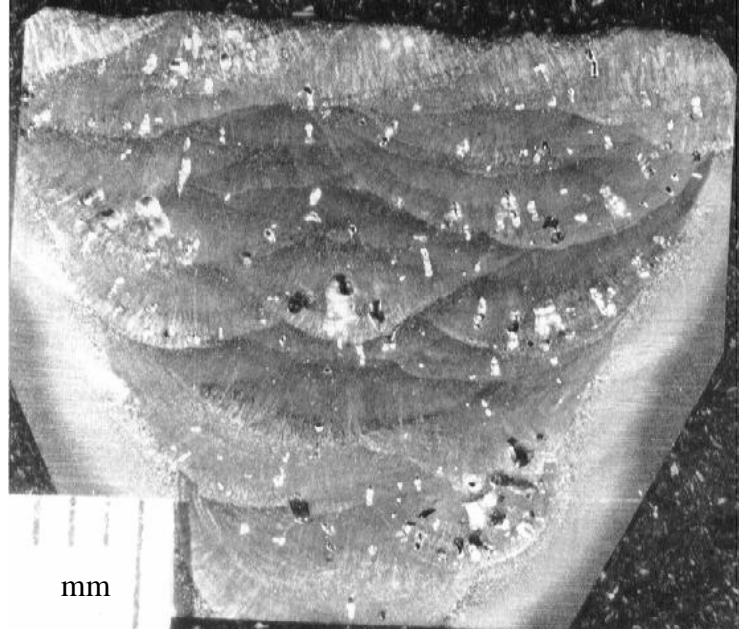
Macro-section and top bead microstructure from 4R1 V-groove weld.
